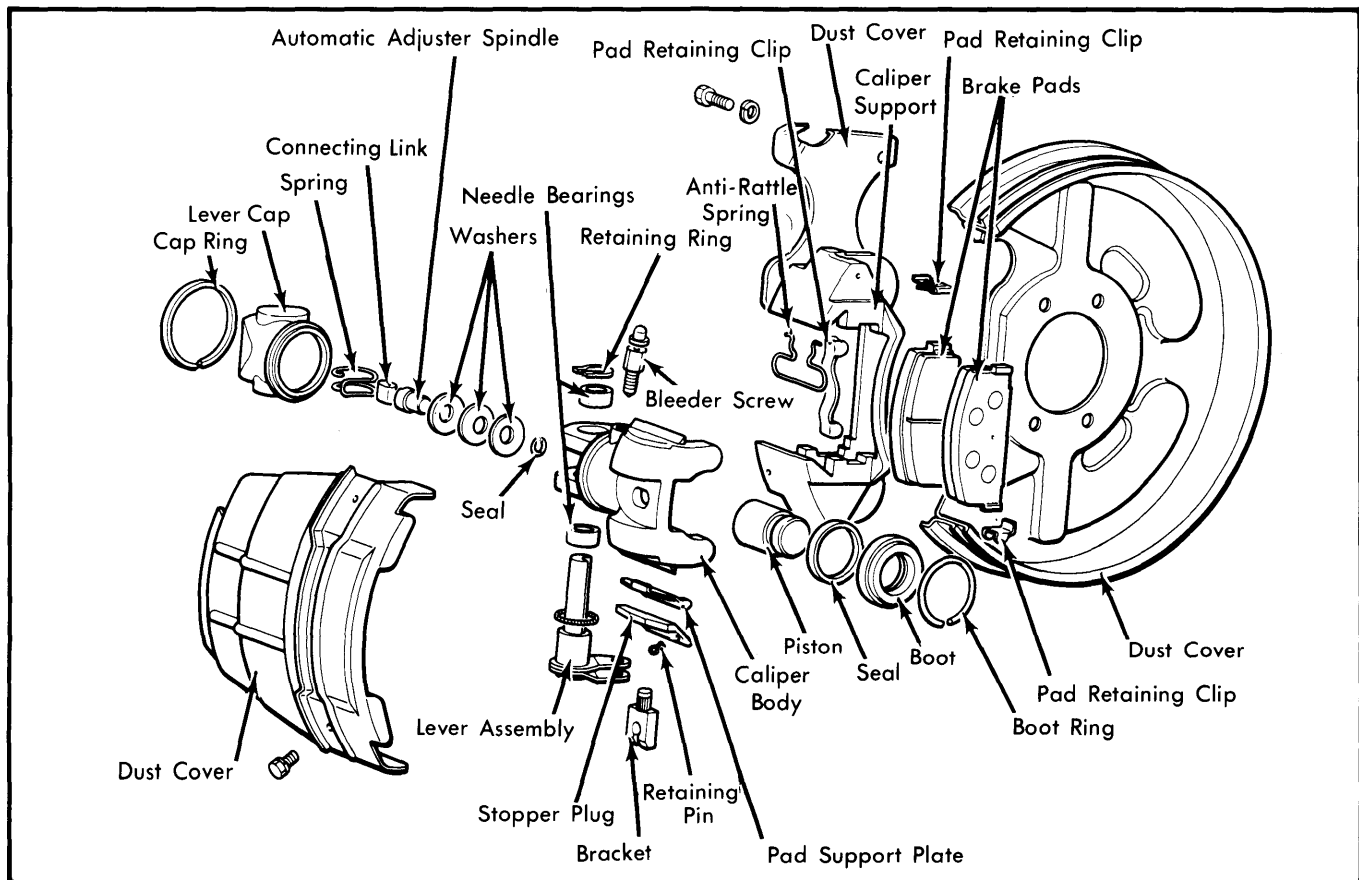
Exploded View of Rear Disc Brake Caliper Assembly
